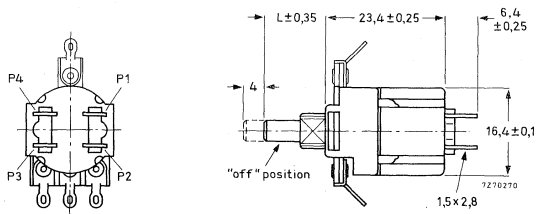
Single potentiometer with d. p. s. t. push-pull switch. This type is supplied with a spindle of polyacetal resin (steel spindle only on request).
